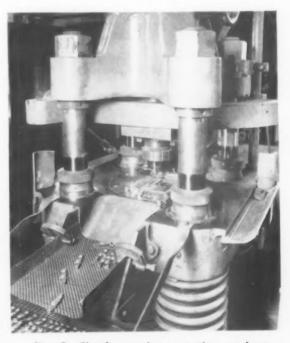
Simple pressing operation produces green powder-iron truck frames having realistic detail. Formerly the truck frames were assembled stampings.
